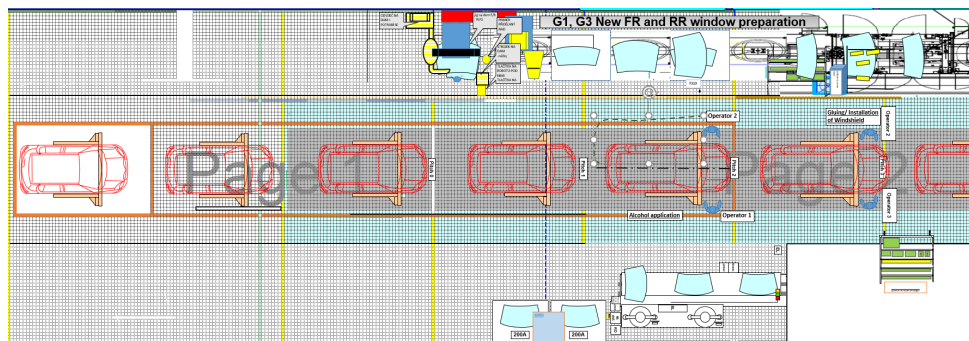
General layout of the Assembly line for degreasing workplace from top view.[62]
